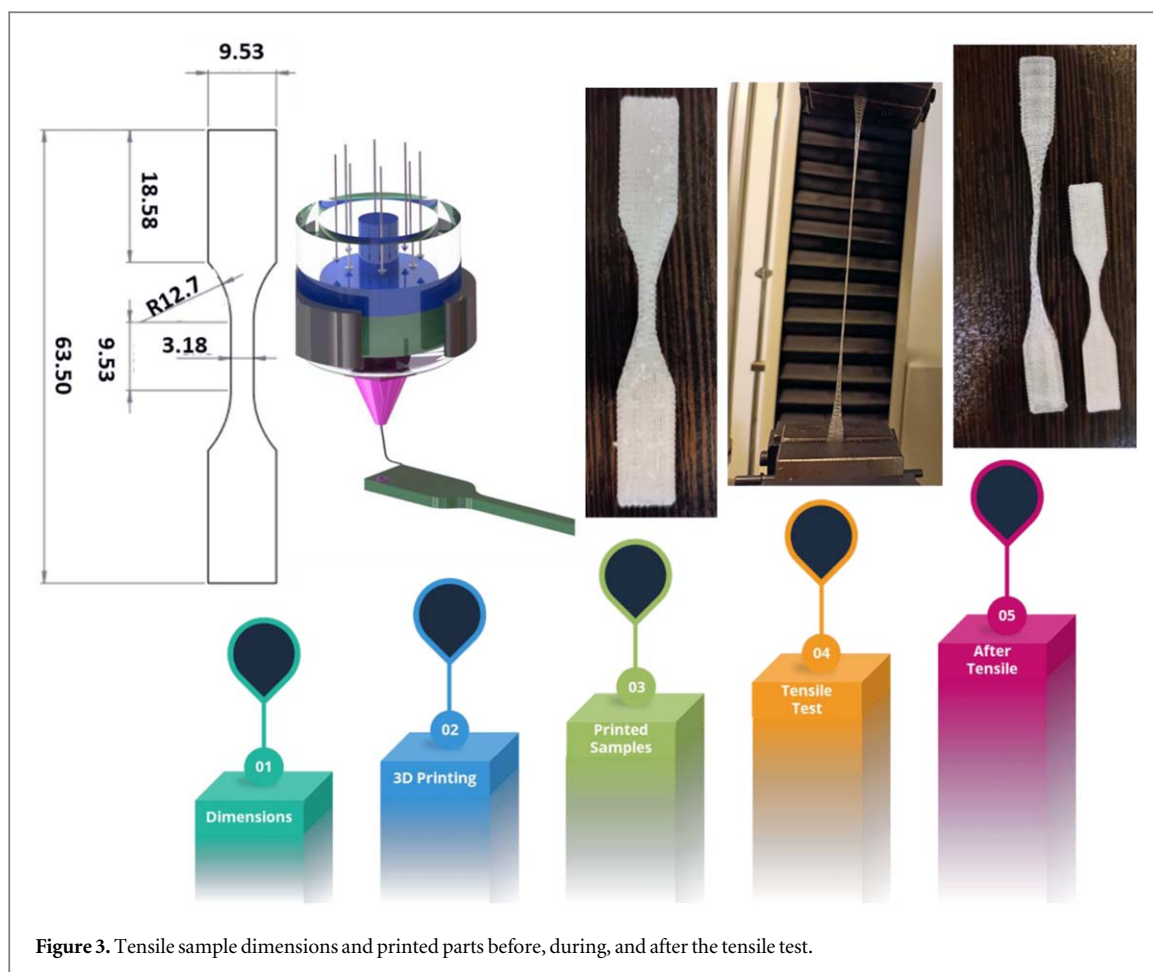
Tensile sample dimensions and printed parts before, during, and after the tensile test.
